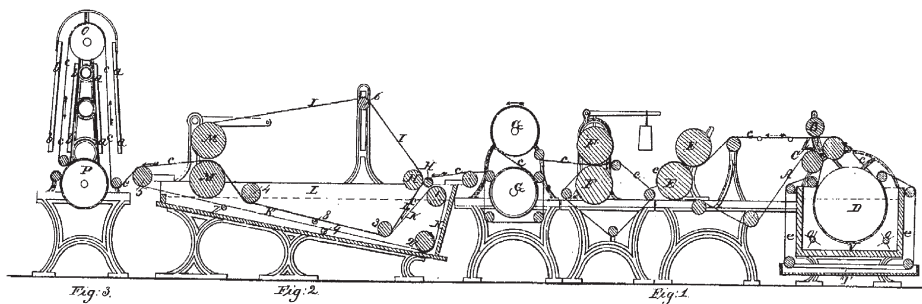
Patent drawing of early paper machine from the 1830s (US patent 8,698). All of the basic processes of a modern machine are present in this machine.
